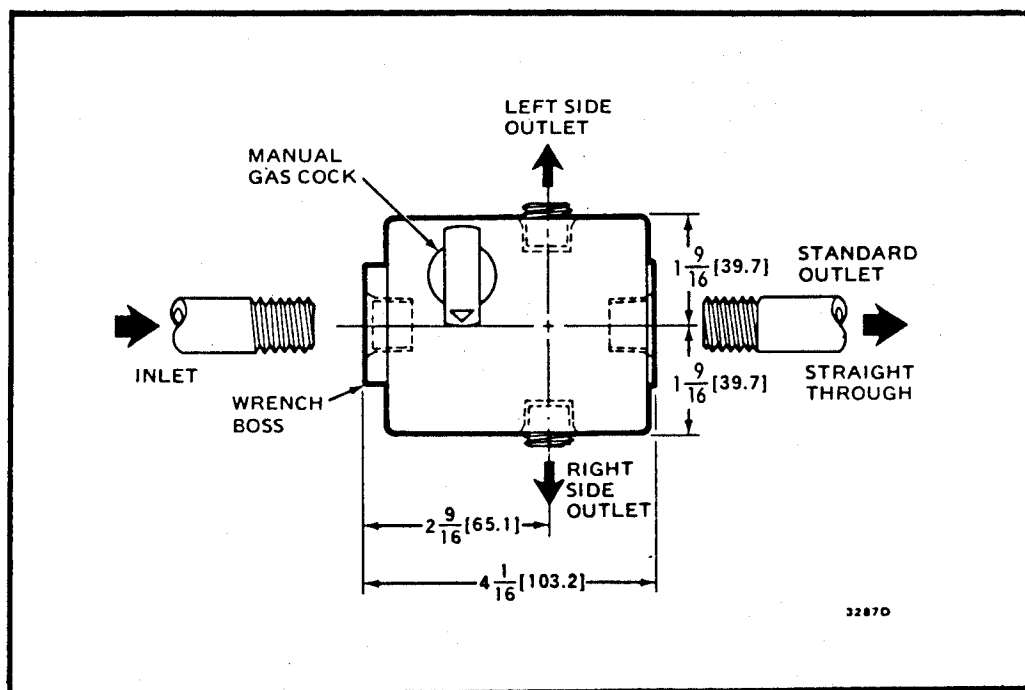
SUPER TRADELINE optional side outlets (V800 shown).
